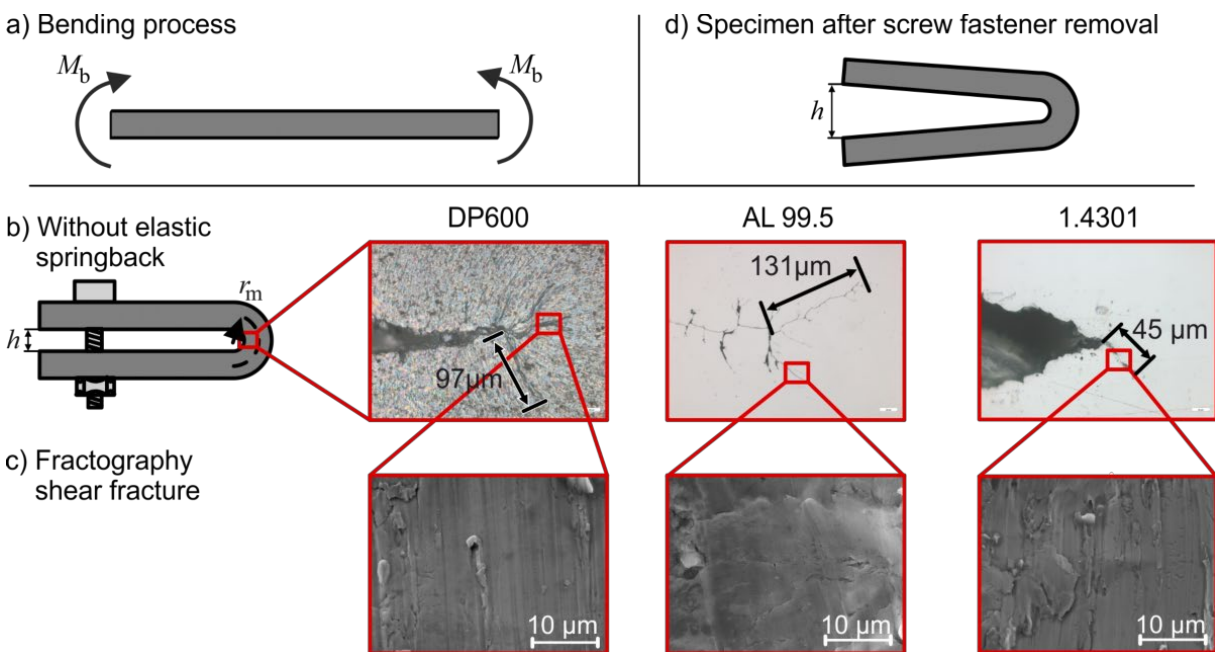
a) Bending of the specimen, b) The initial crack in the fastened configuration without elastic springback, c) The SEM analysis of the resulting shear fracture surface and d) The increase in gap height after the elastic springback.
